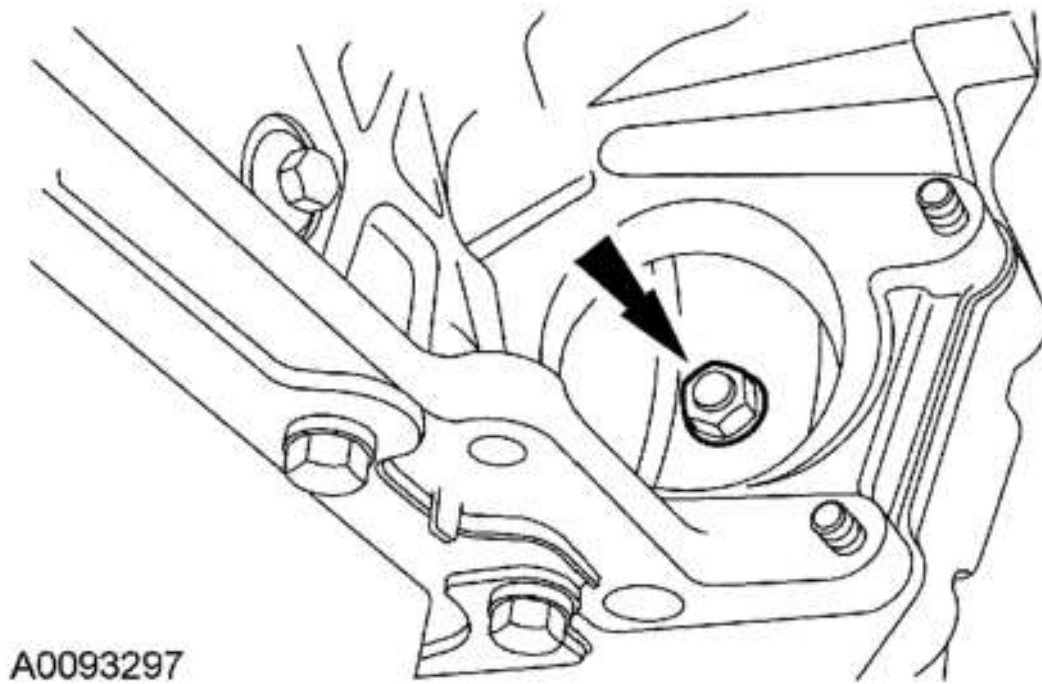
Discarding Flexplate-To-Torque Converter Nuts
